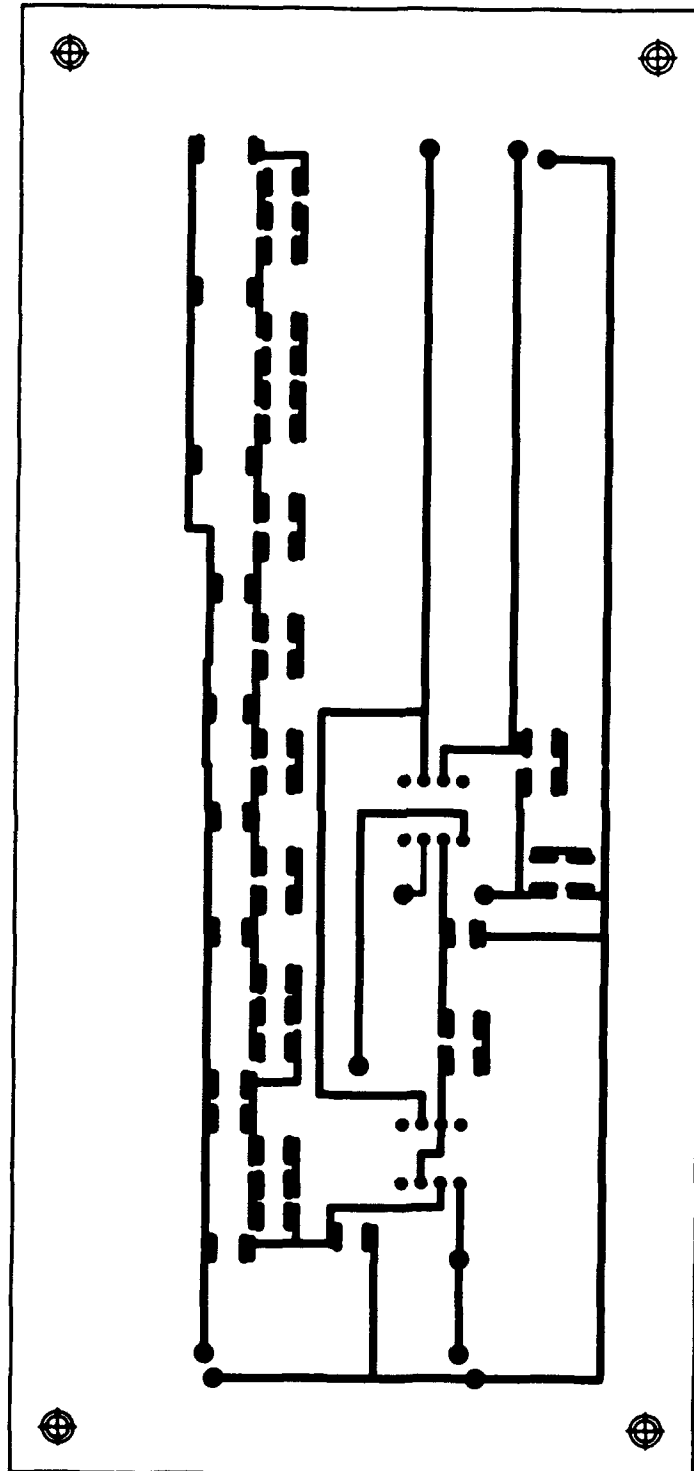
Artwork for the Oldfield Surface Mount Component Printed Circuit Board Design (scale 1 : 1).
